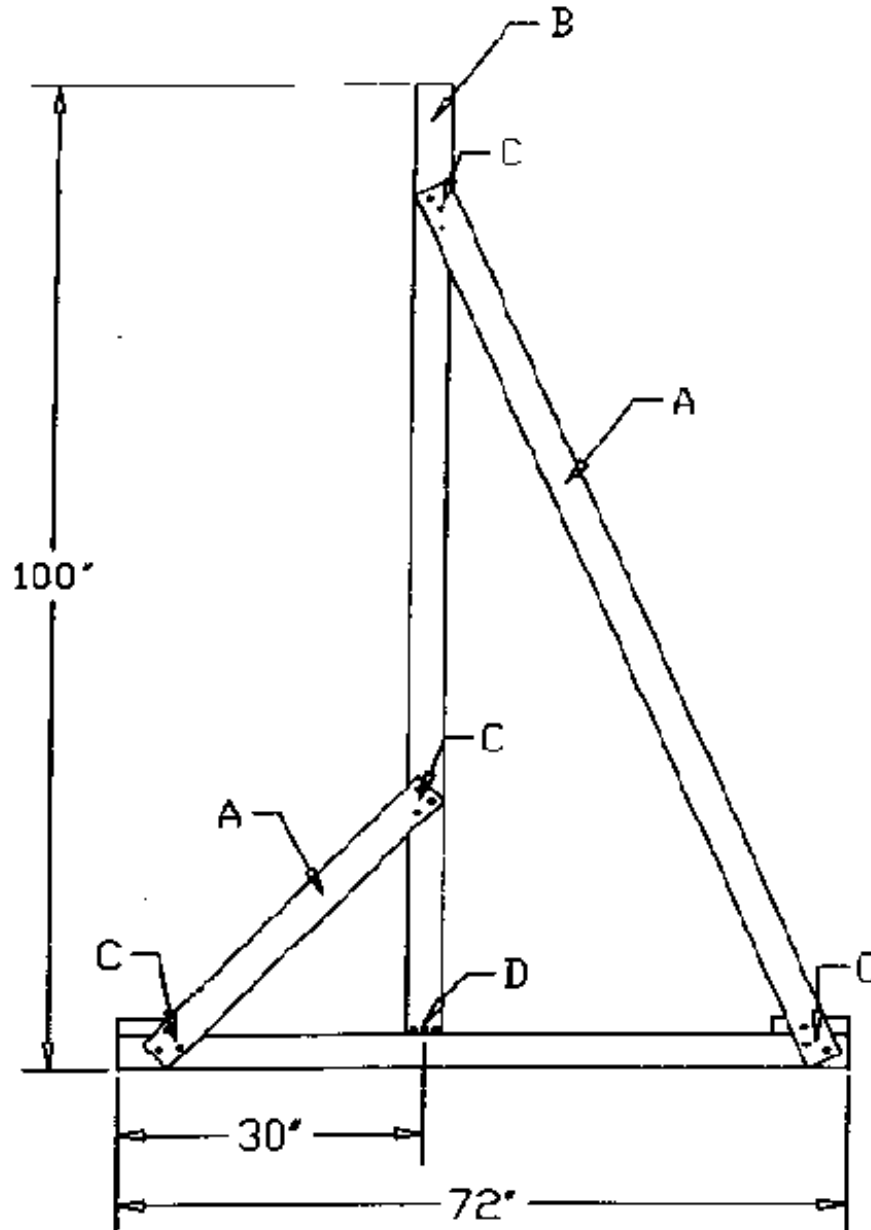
KMAC Sign Stand Drawing (1 of 3)
